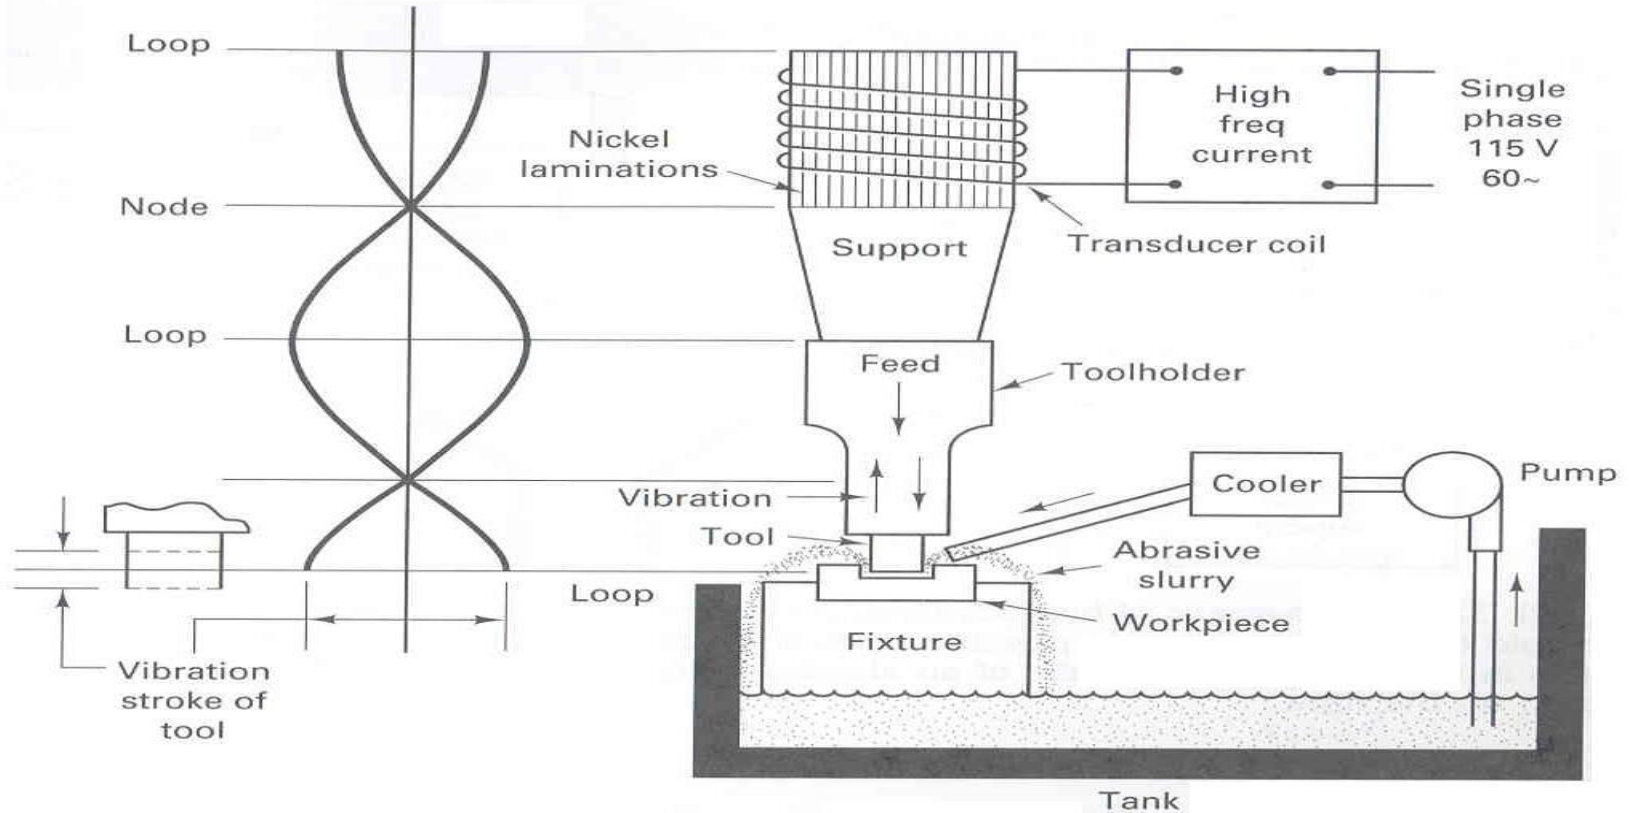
Sinking a hole in a workpiece by ultrasonic machining.
